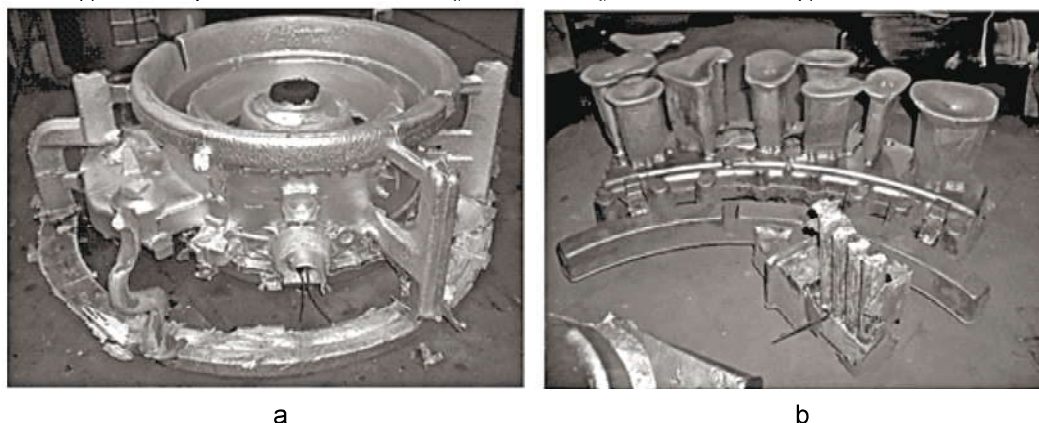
Castings made of improved magnesium alloys: a – "fuel pump housing", b – "drive box housing".
